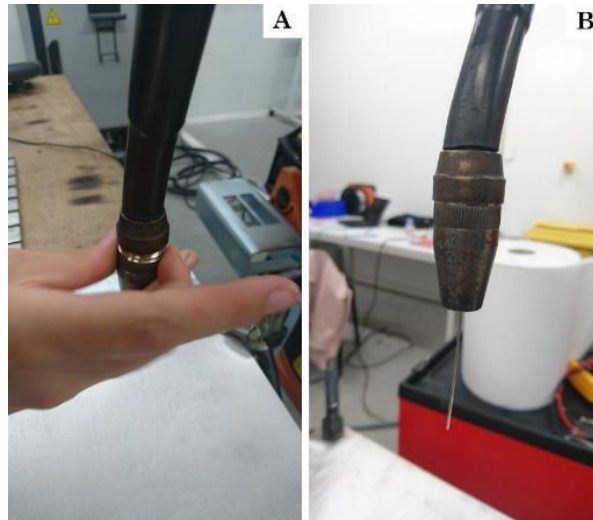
A-Tighten the booth nozzles covers; B-Cut the wire with 15 mm until it gets like this
